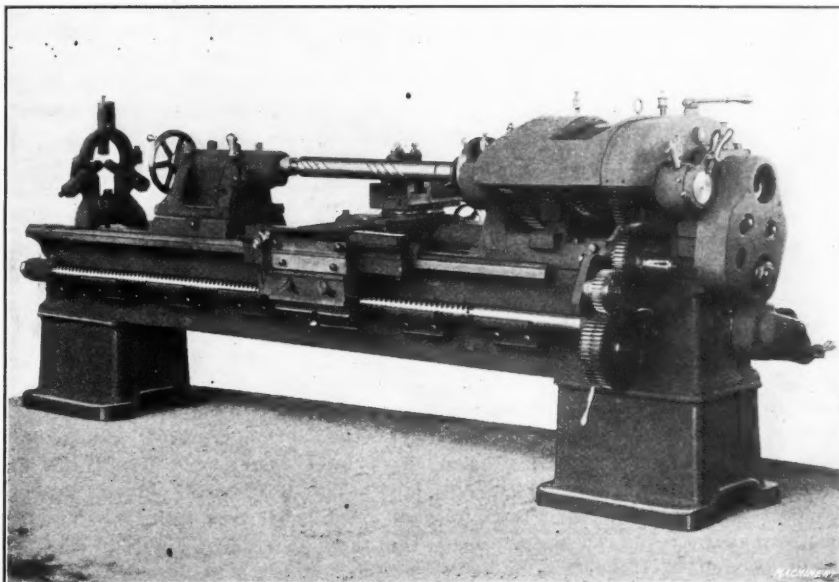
Lodge and Shipley Lathe with Coarse-pitch Chasing Attachment
